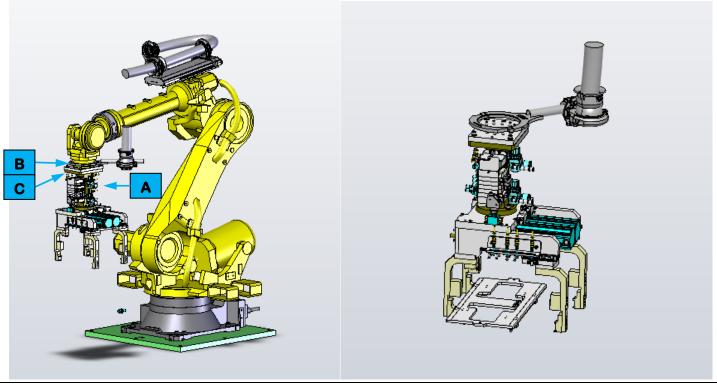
An illustration of the Press Unload Robot end of arm tooling.
